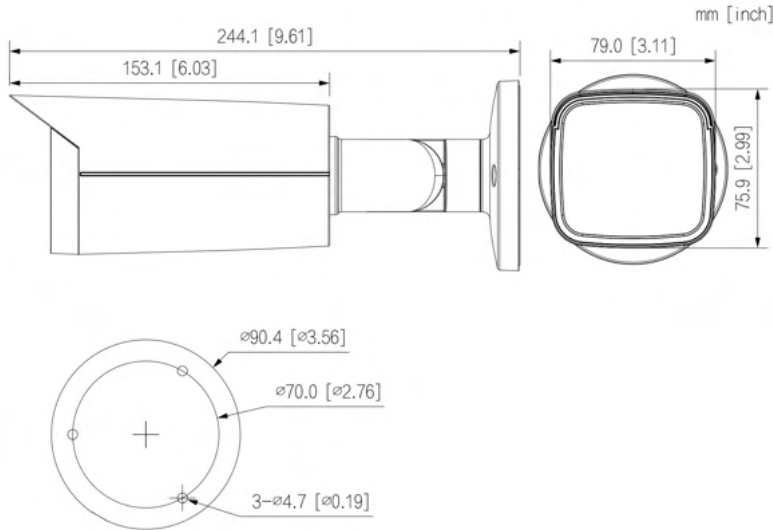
Bullet Cam. Dimensions 2 (CCTV Kits, n.d.)
